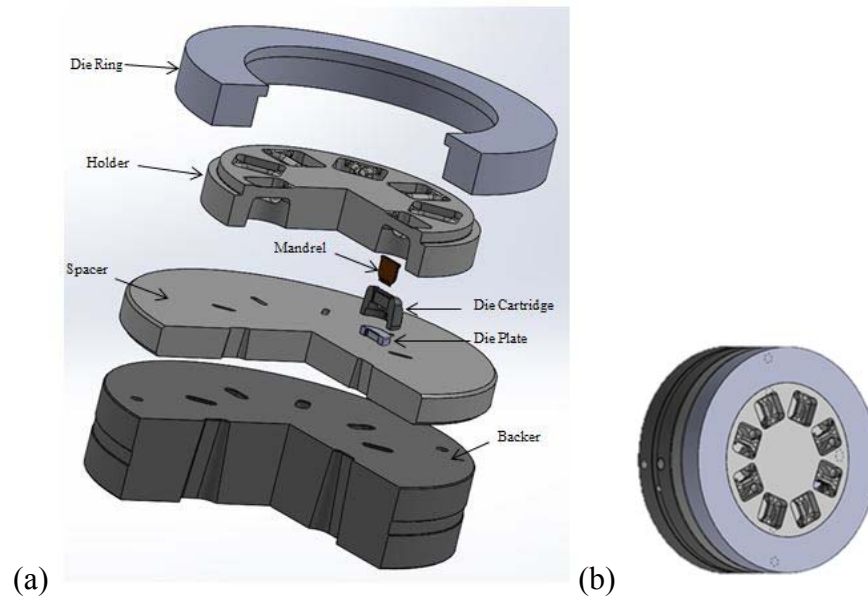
(a) Exploded assembly view; and (b) modular die tool stack
